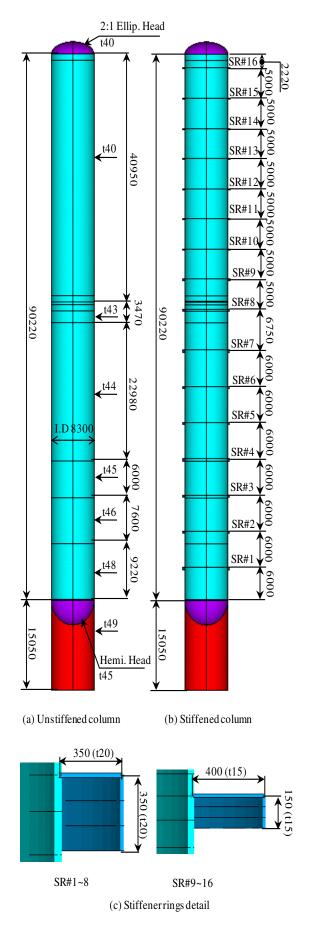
Geometry and dimension for (a)unstiffened column, (b) stiffened column and (c) stiffener ring (unit in millimetre).
